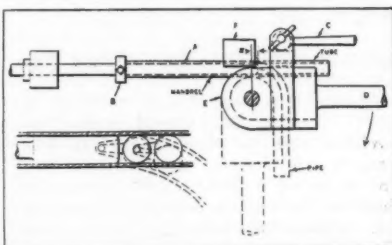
Rotating form and solid mandrel over which pipe is drawn (detail view). Ball type of mandrel used for some tube-bending operations.
